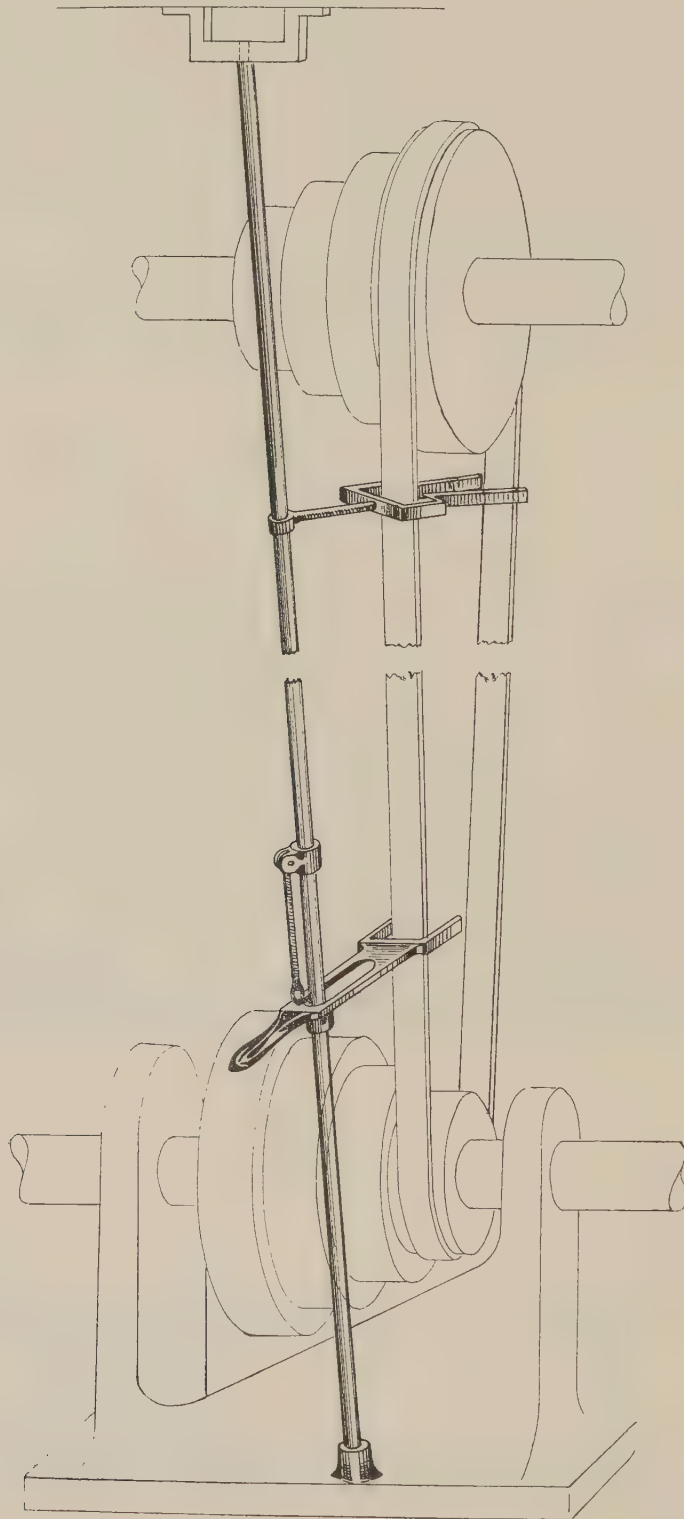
SPEED CONE BELT SHIFTER WITH TWO FORKS.
